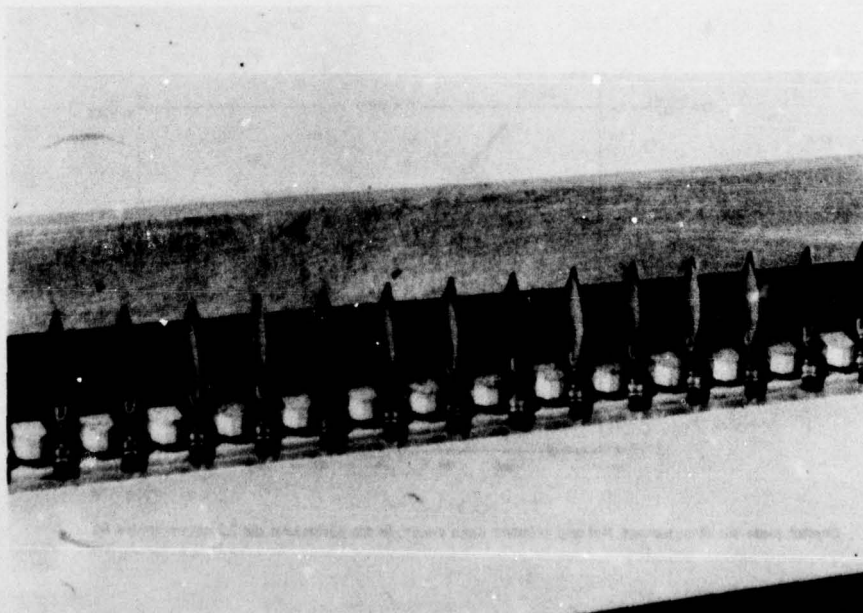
Mounting and transfer fixture for directly plated crystals.
